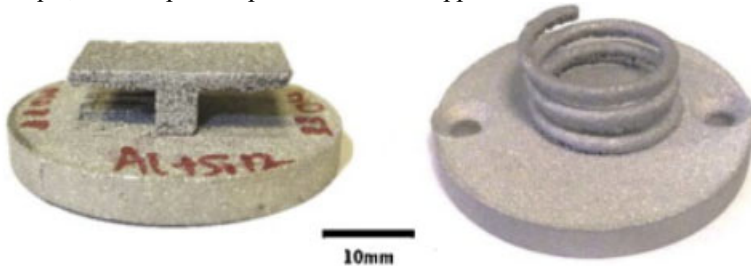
Anchorless selective laser sintering technique for unsupported printing [10]
